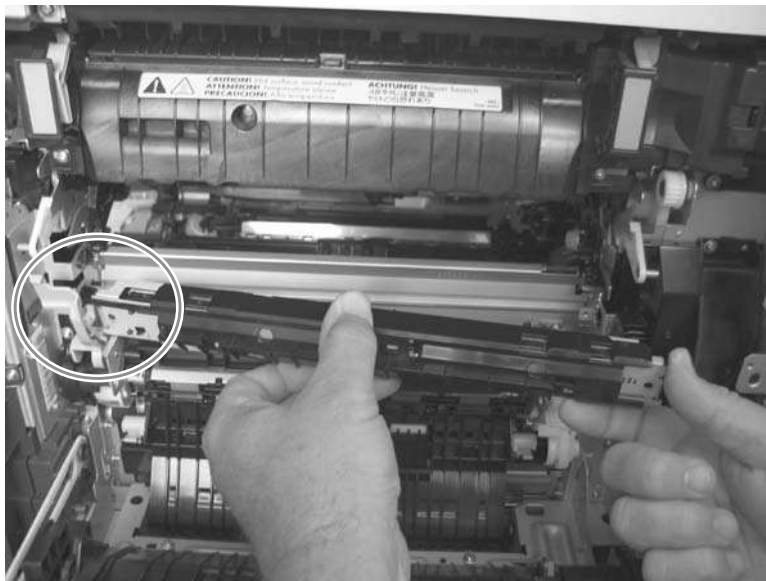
Remove the RD sensor assembly (2 of 6)
